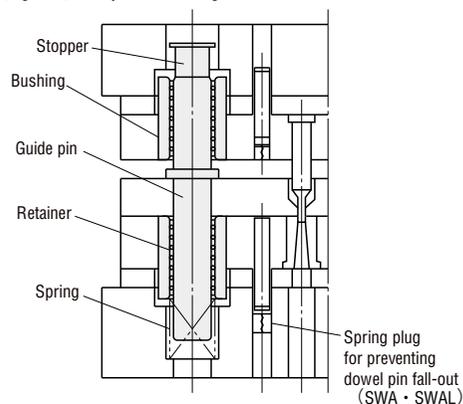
Type fixed to punch plate (Figure 2) Type fixed to stripper plate
